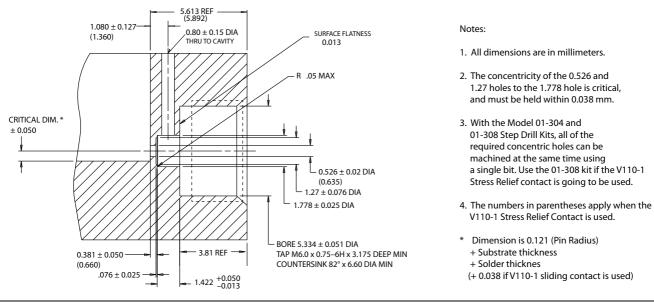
V102F-R Machining Dimensions for the Sparkplug Connector Mounting Holes
